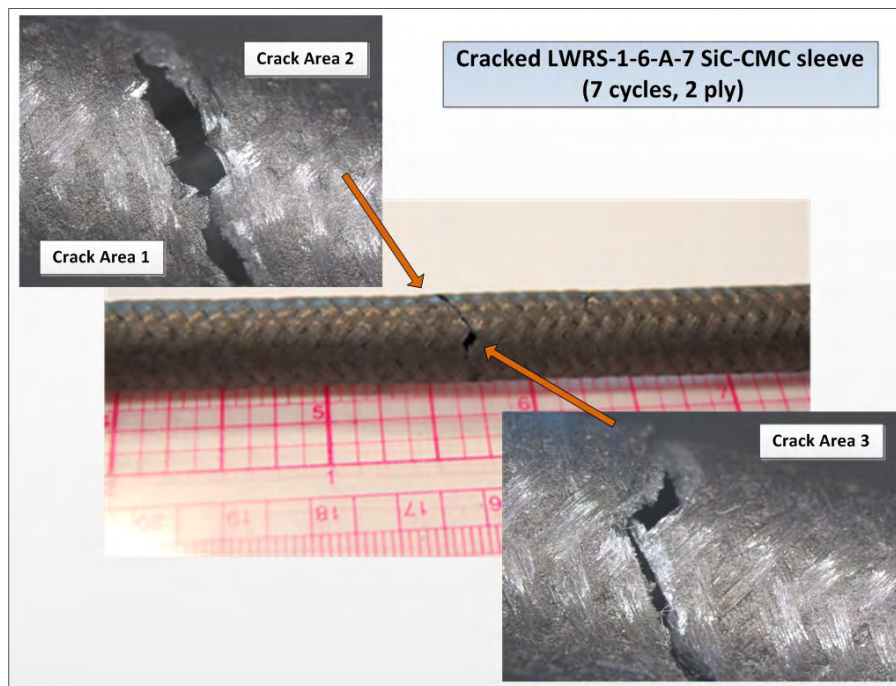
Figure showing the fractured LWRs-1-6-A-7 SiC-CMC sleeve. This sleeve cracked during the INL fabrication of the HWCF mock-up sample.
